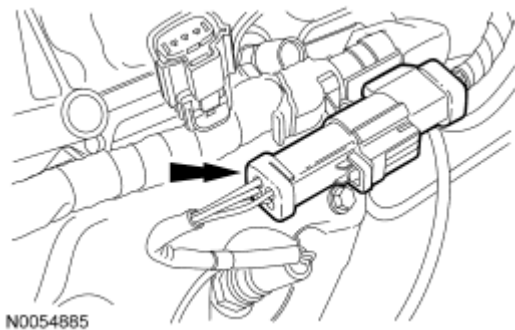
Locating LH Heated Oxygen Sensor (HO2S) Electrical Connector
